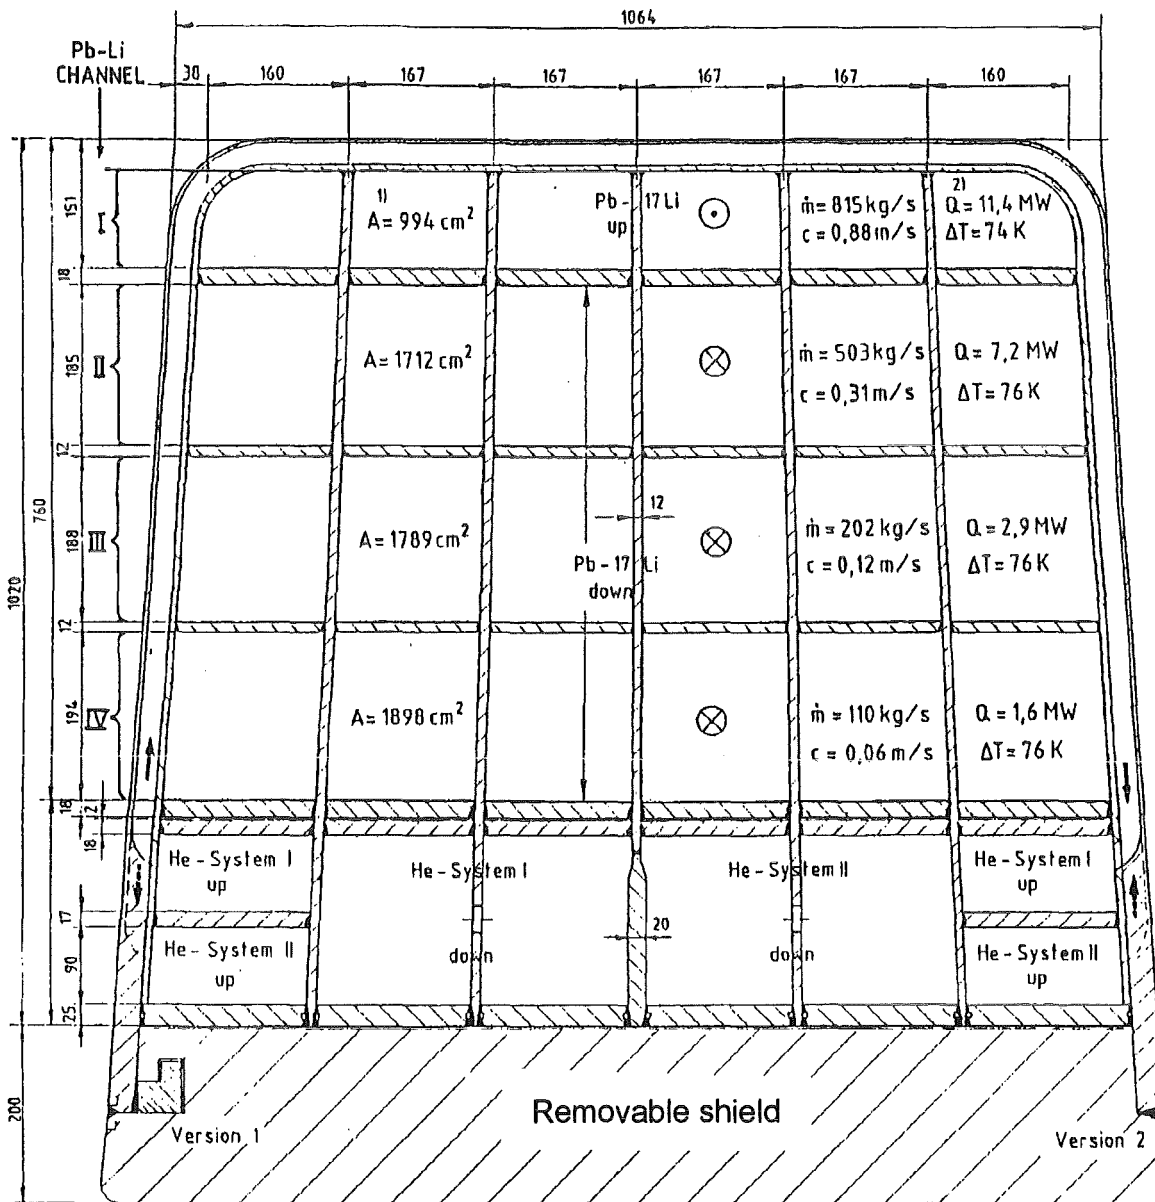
DEMO cross section of the dual coolant blanket. The blanket parts considered include the outboard central and top part, and the inboard central, top, and bottom parts (see text in 2.1 on page 3 and main dimensions in Table 19 on page 73).
